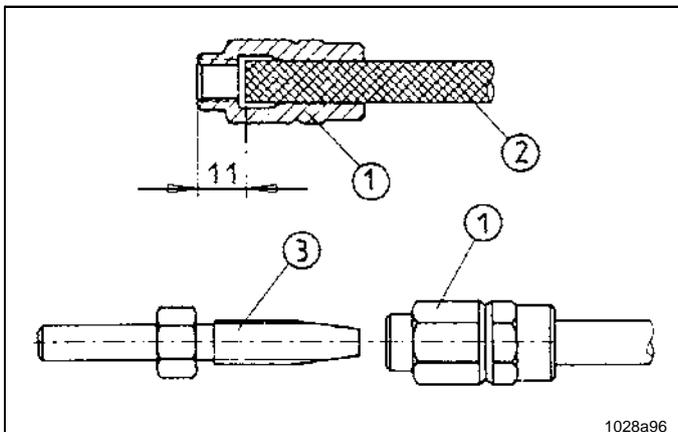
Pre-assembly of the threaded sleeves and hose studs onto the main line
